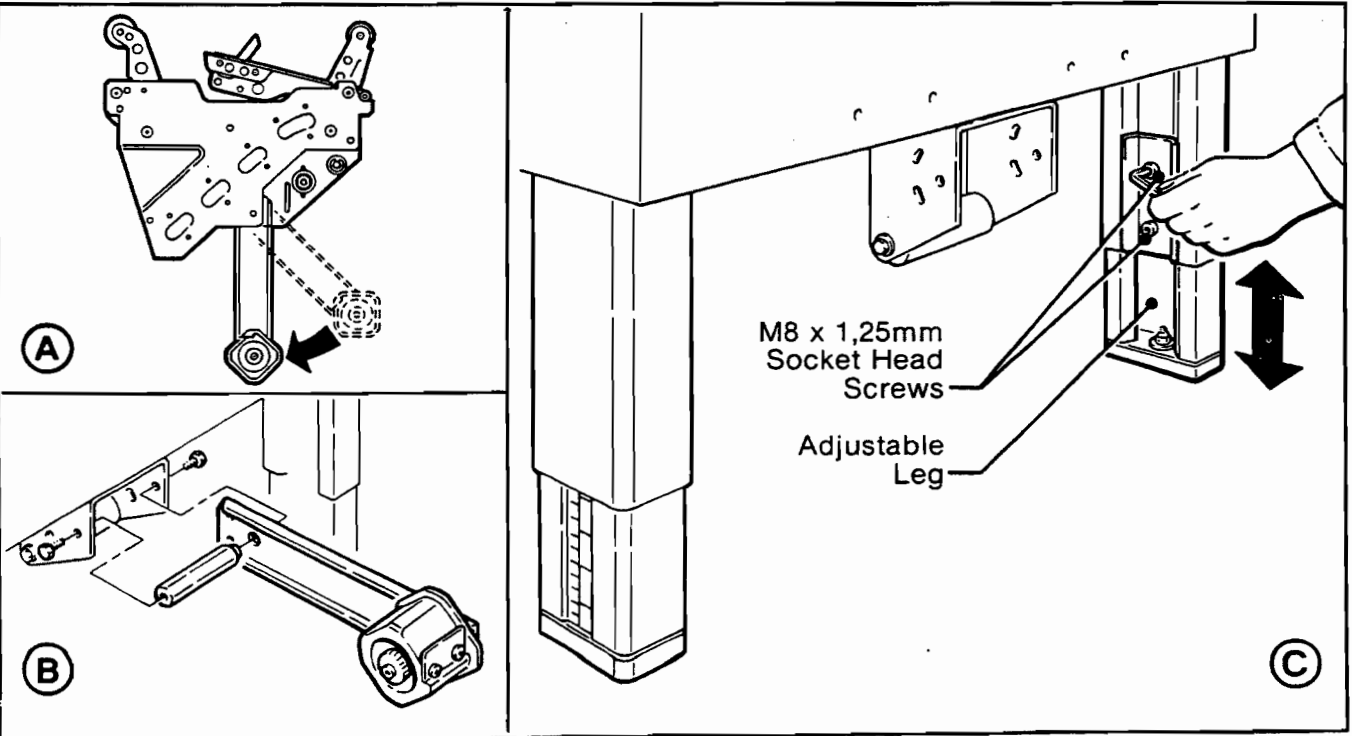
Conveyor Bed Height Adjustment and Lower Tape Drum Bracket Position
